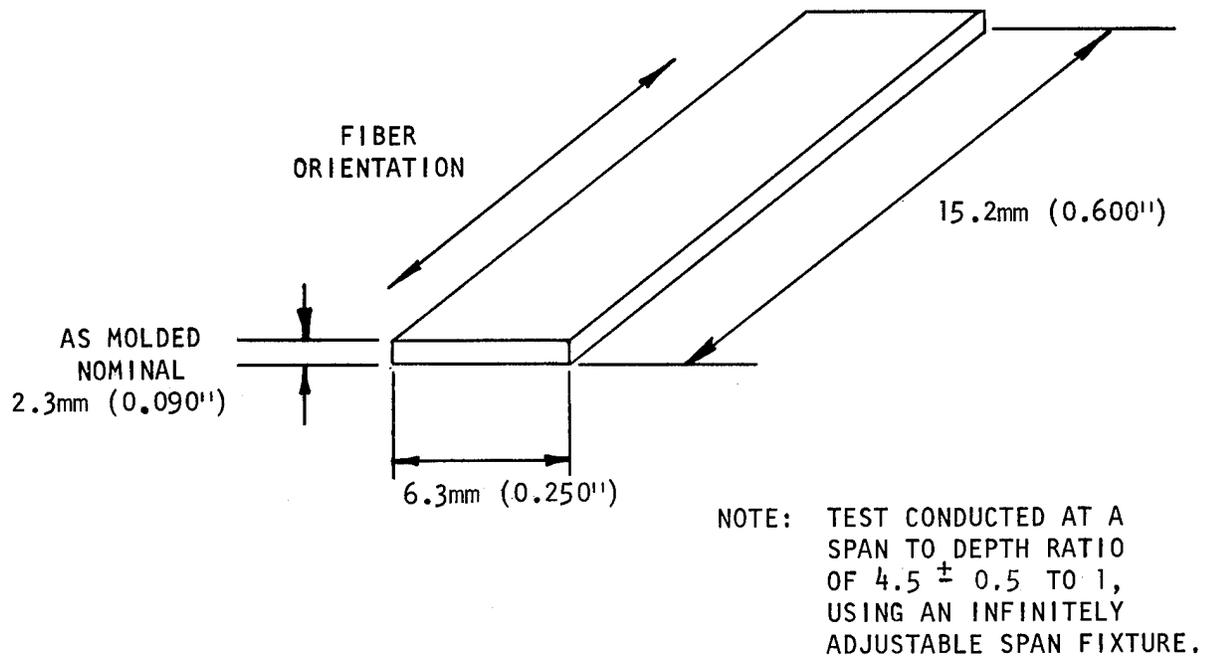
SHORT BEAM SHEAR SPECIMEN
